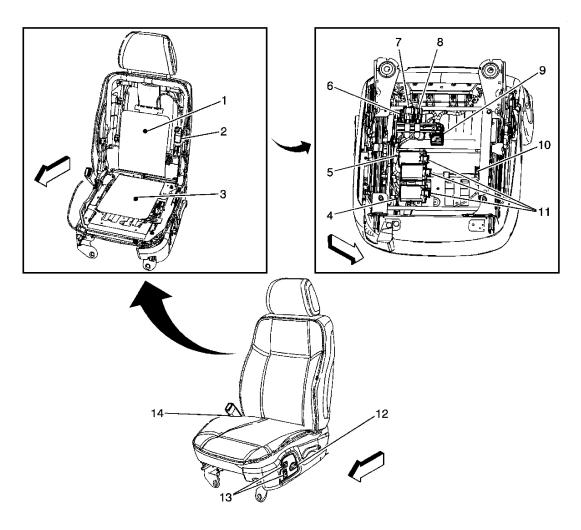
Identifying Driver Seat Components Courtesy of GENERAL MOTORS CORP.
